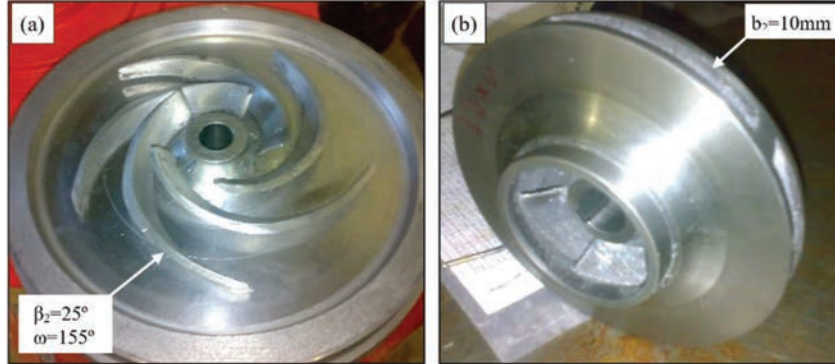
(a) Pump impeller casting model and (b) Manufactured impeller.
